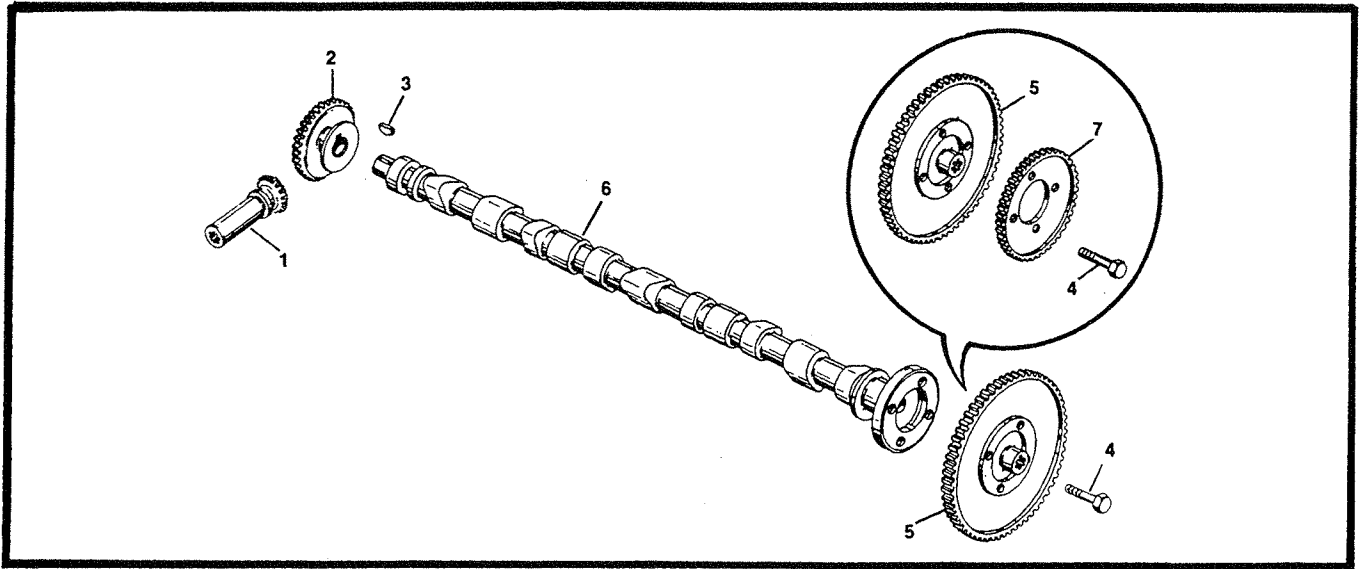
CAMSHAFT ASSEMBLY.
